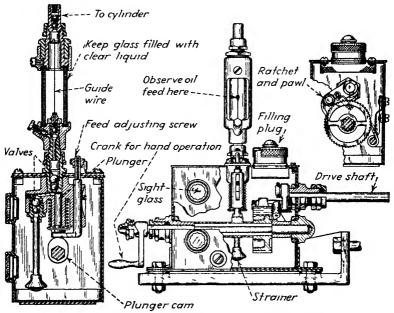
Cross section of cylinder force-feed lubricator.
